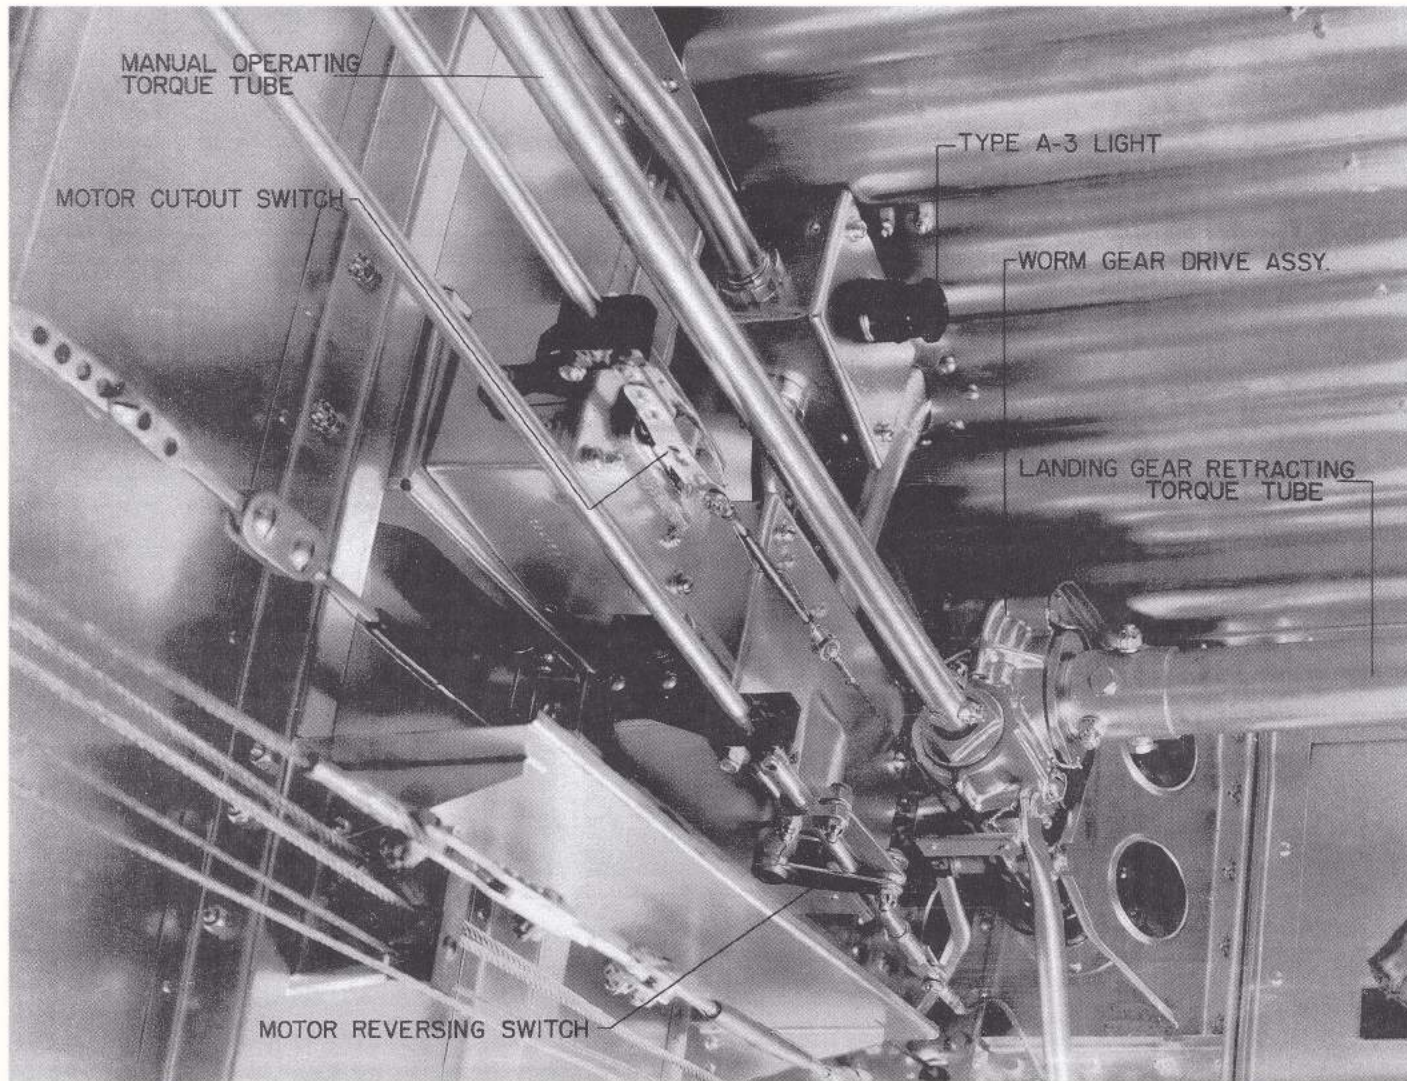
LANDING GEAR RETRACTING MECHANISM IN BOMB BAY
